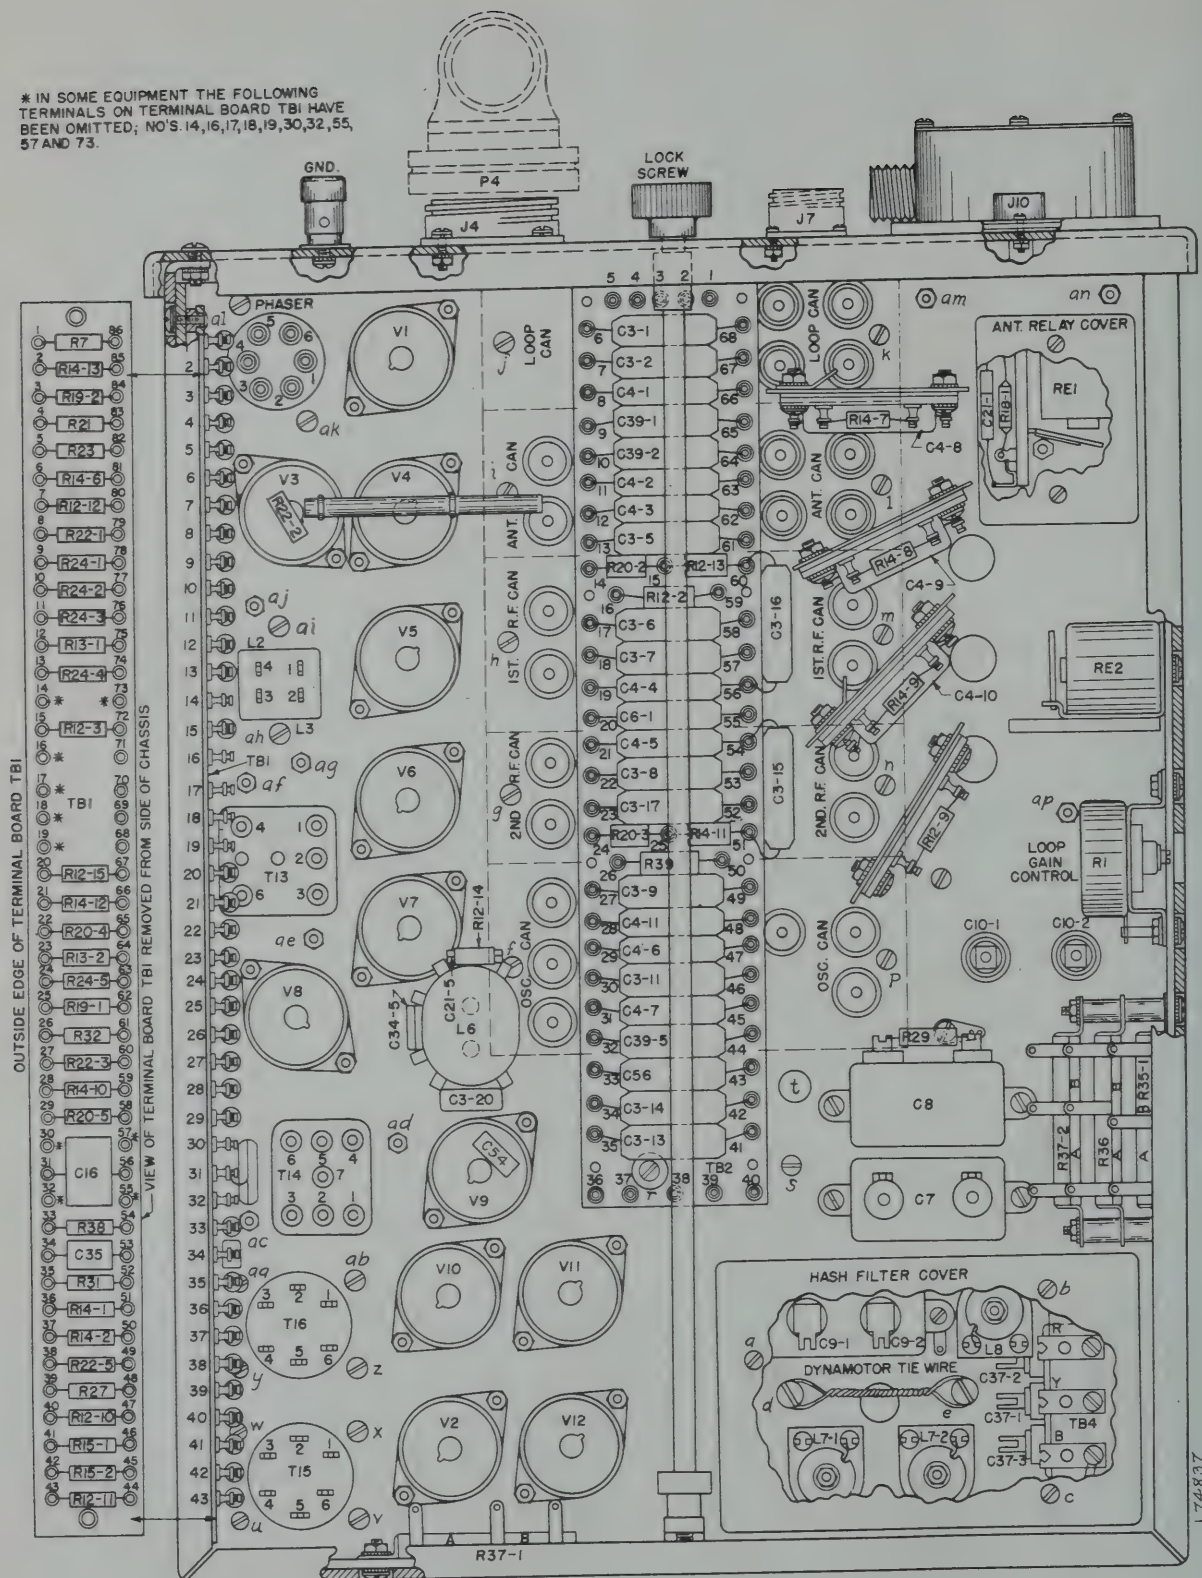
TYPE MN-26 RADIO COMPASS, CHASSIS LAYOUT
